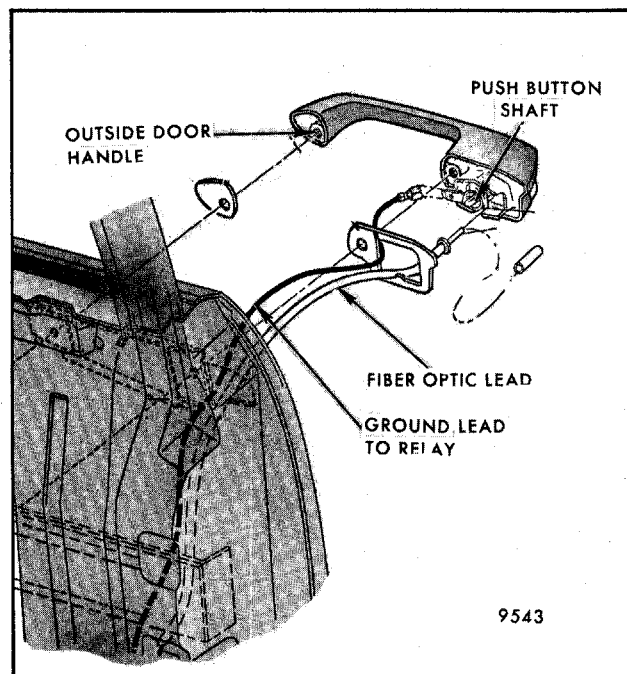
Illuminated Lock Cylinder Door Handle Push Button Assembly
